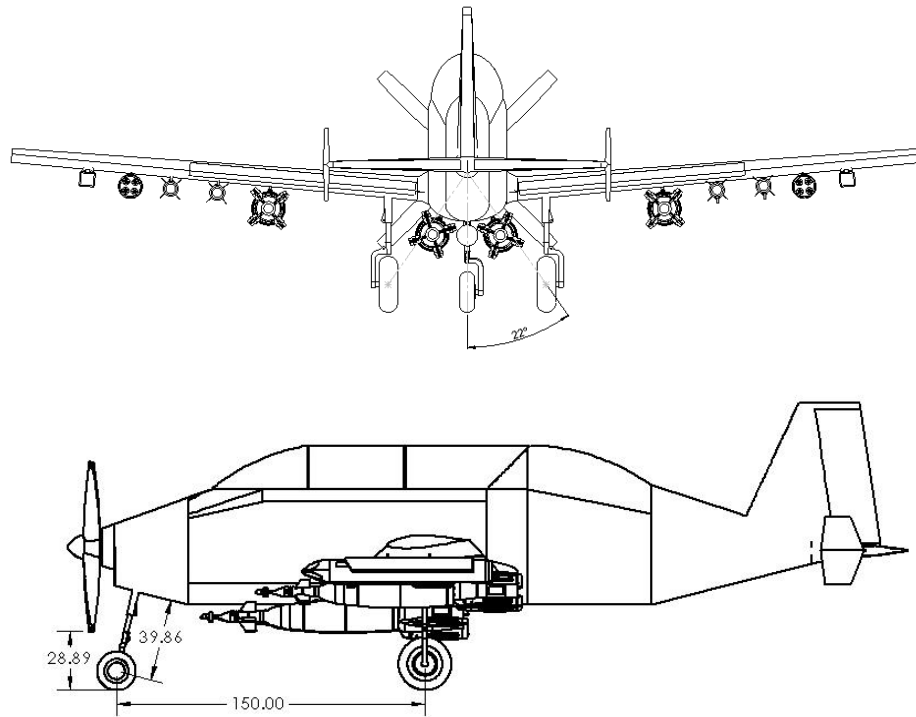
SolidWorks drawings of landing gear spacing and engine clearance. Dimensions in inches.
